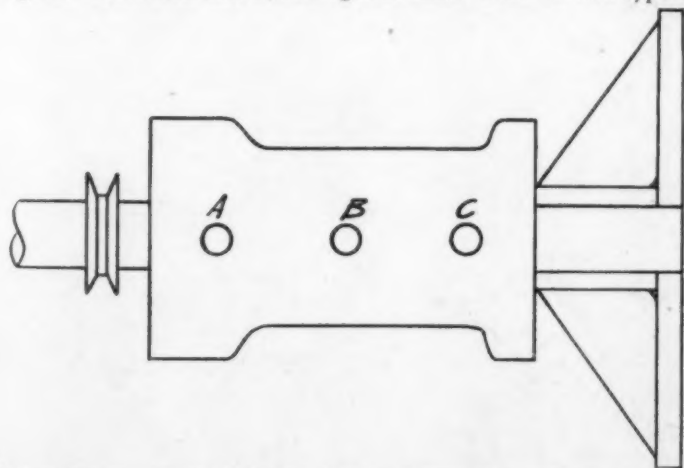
VIEW OF GENERAL TYPE OF CENTRIFUGAL CASTING MACHINE USED FOR LIGHT WORK. UNIT CAN BE SWIVELED AT POINTS *A*, *B* OR *C* TO PROVIDE VARIABLE PITCH.
